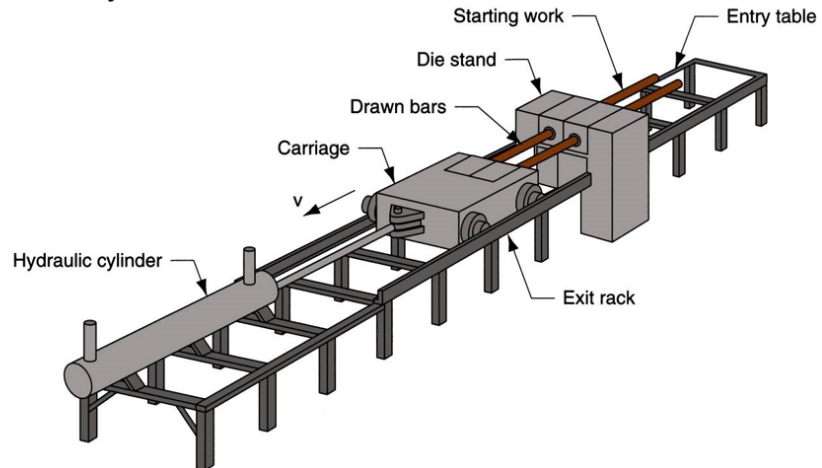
Hydraulically operated draw bench for drawing metal bars.
